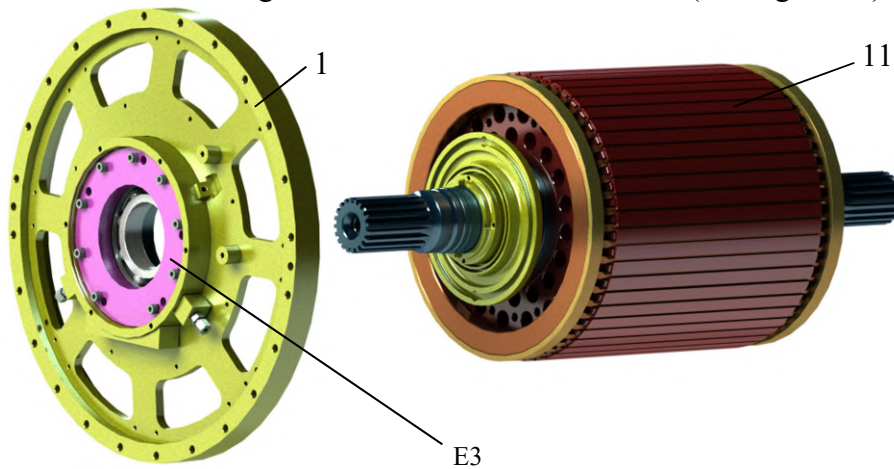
Dismantling of the Bearing Shield from the Rotor (Drive Side)
